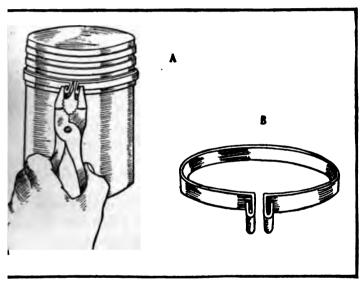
Simple Method of Removing or Installing Piston Rin
